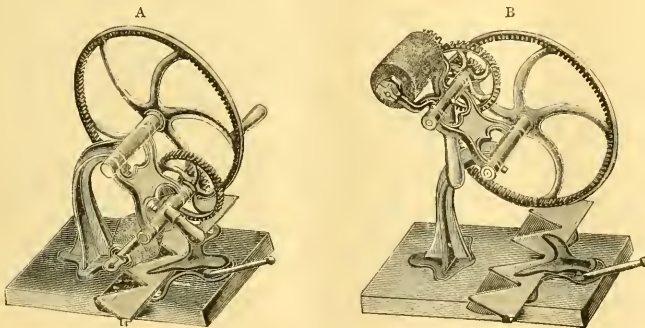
GRINDING MACHINE: A, IN USE GRINDING REAPER-KNIFE; B, IN USE ON ORDINARY WORK. (SEE P. 748.)
